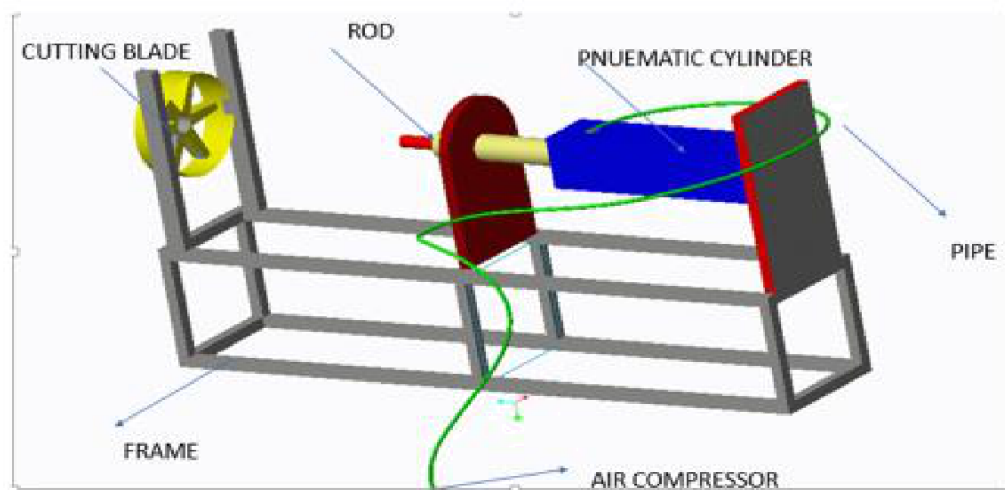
DESIGN OF CUTTING TOOL AND FRAME
